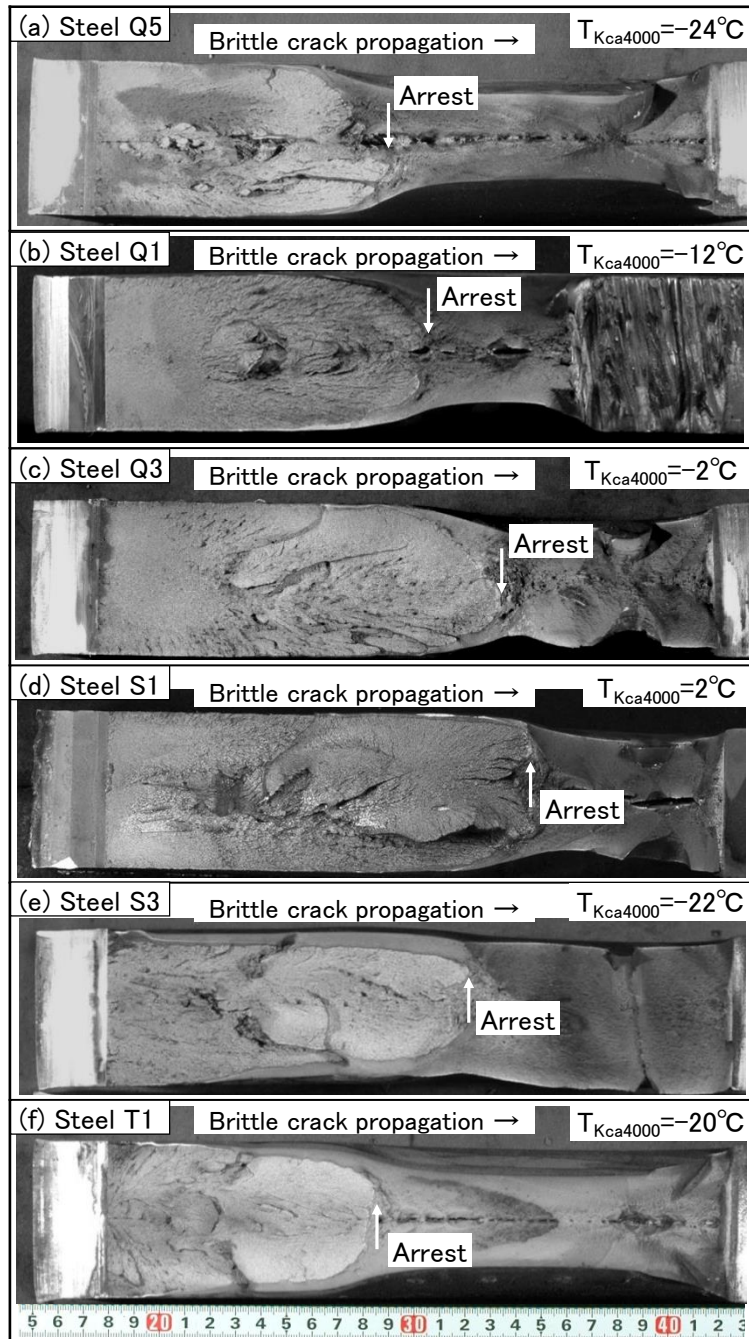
Fracture appearance of ESSO test specimen for the Steels Q1, Q3, Q5, S1, S3 and T1.
